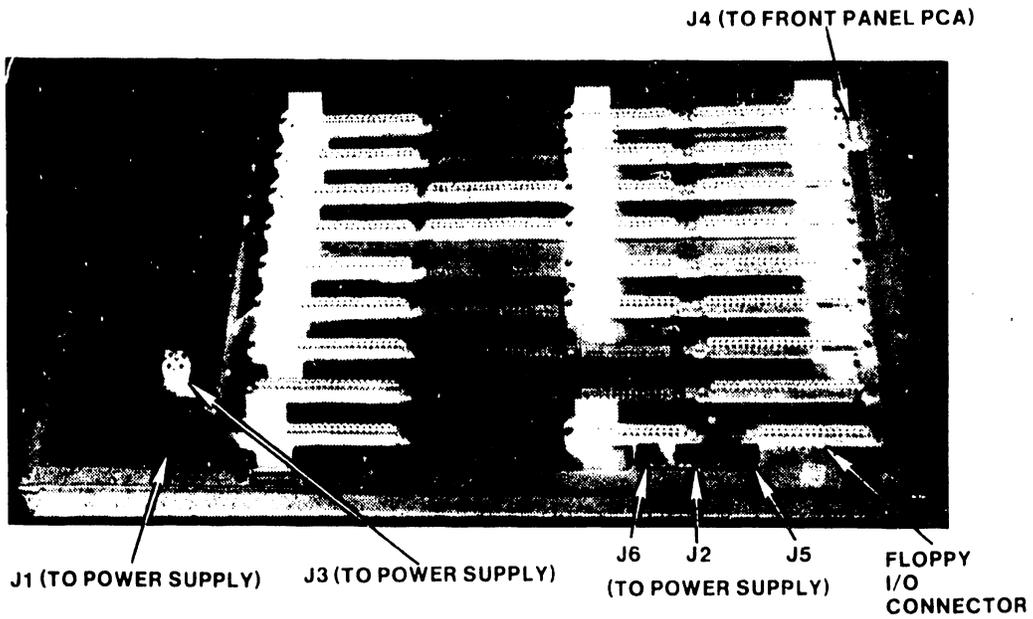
210-7507 MOTHERBOARD PCB AND CONNECTOR LOCATIONS
